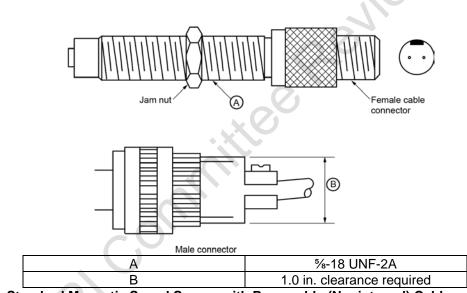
Standard Magnetic Speed Sensor with Removable (Nonintegral) Cable and Connector
